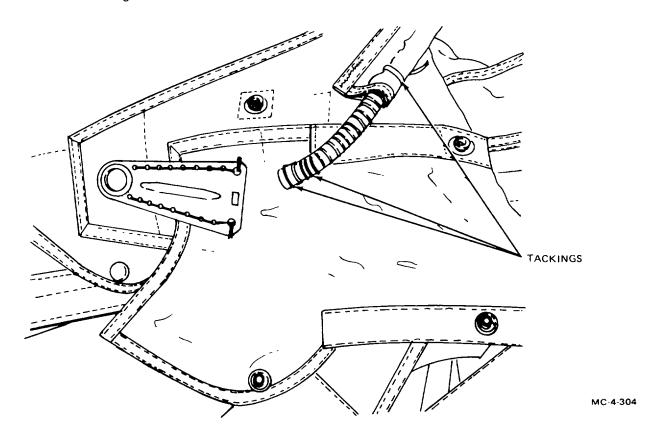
Main Ripcord Housing, Lower Tacking Removal.
